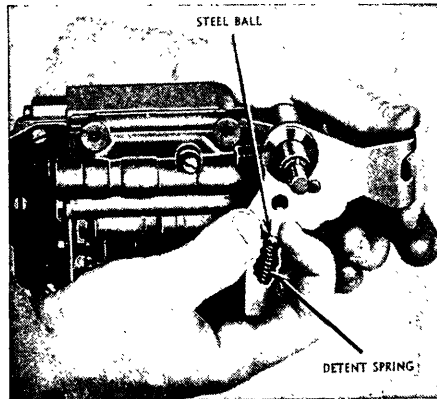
In servicing the control valve, never grip it in a vise or use force in removing or installing valves or plugs. When disassembling, lay the control valve flat on clean paper, and proceed as follows: Move control lever slowly counter-clockwise while holding rag to catch detent tension spring and ball
